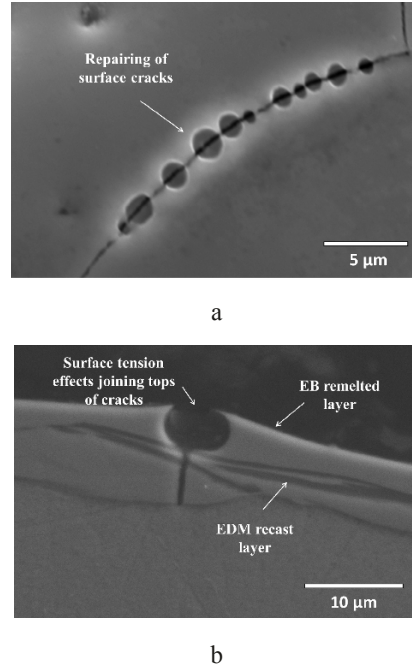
Mechanism of repair of EDM surface cracks after irradiation
